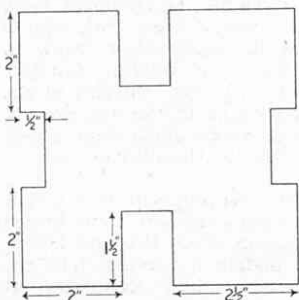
Scale drawing of the board on which the horse-shoe magnet is mounted.
